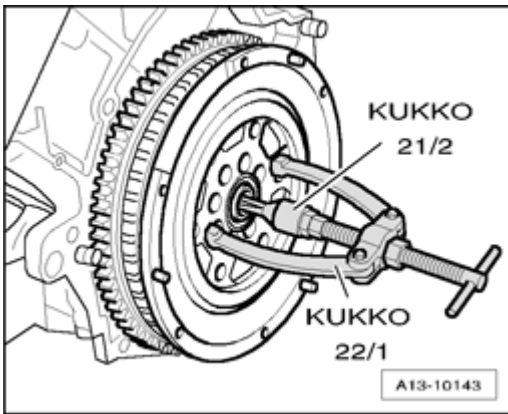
Pulling Out Needle Bearing Using Internal Puller Kukko 21/2 And Counter-Support Kukko 22/1
